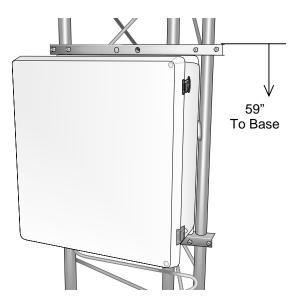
ENC 16/18 Enclosure on UT30
